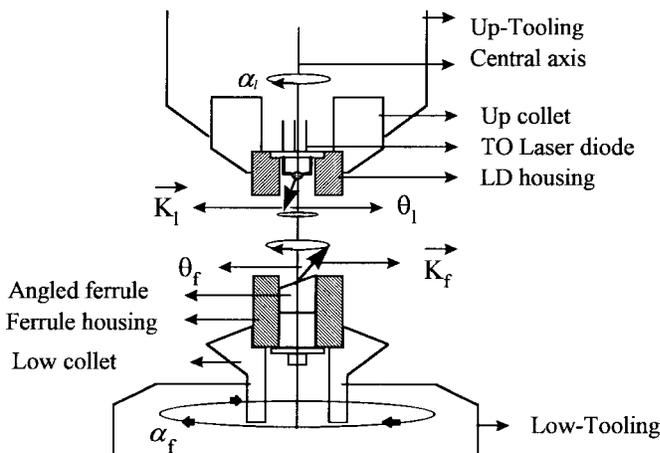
Schematic diagram of an OSA packaging system for autoalignment and laser-welding.
